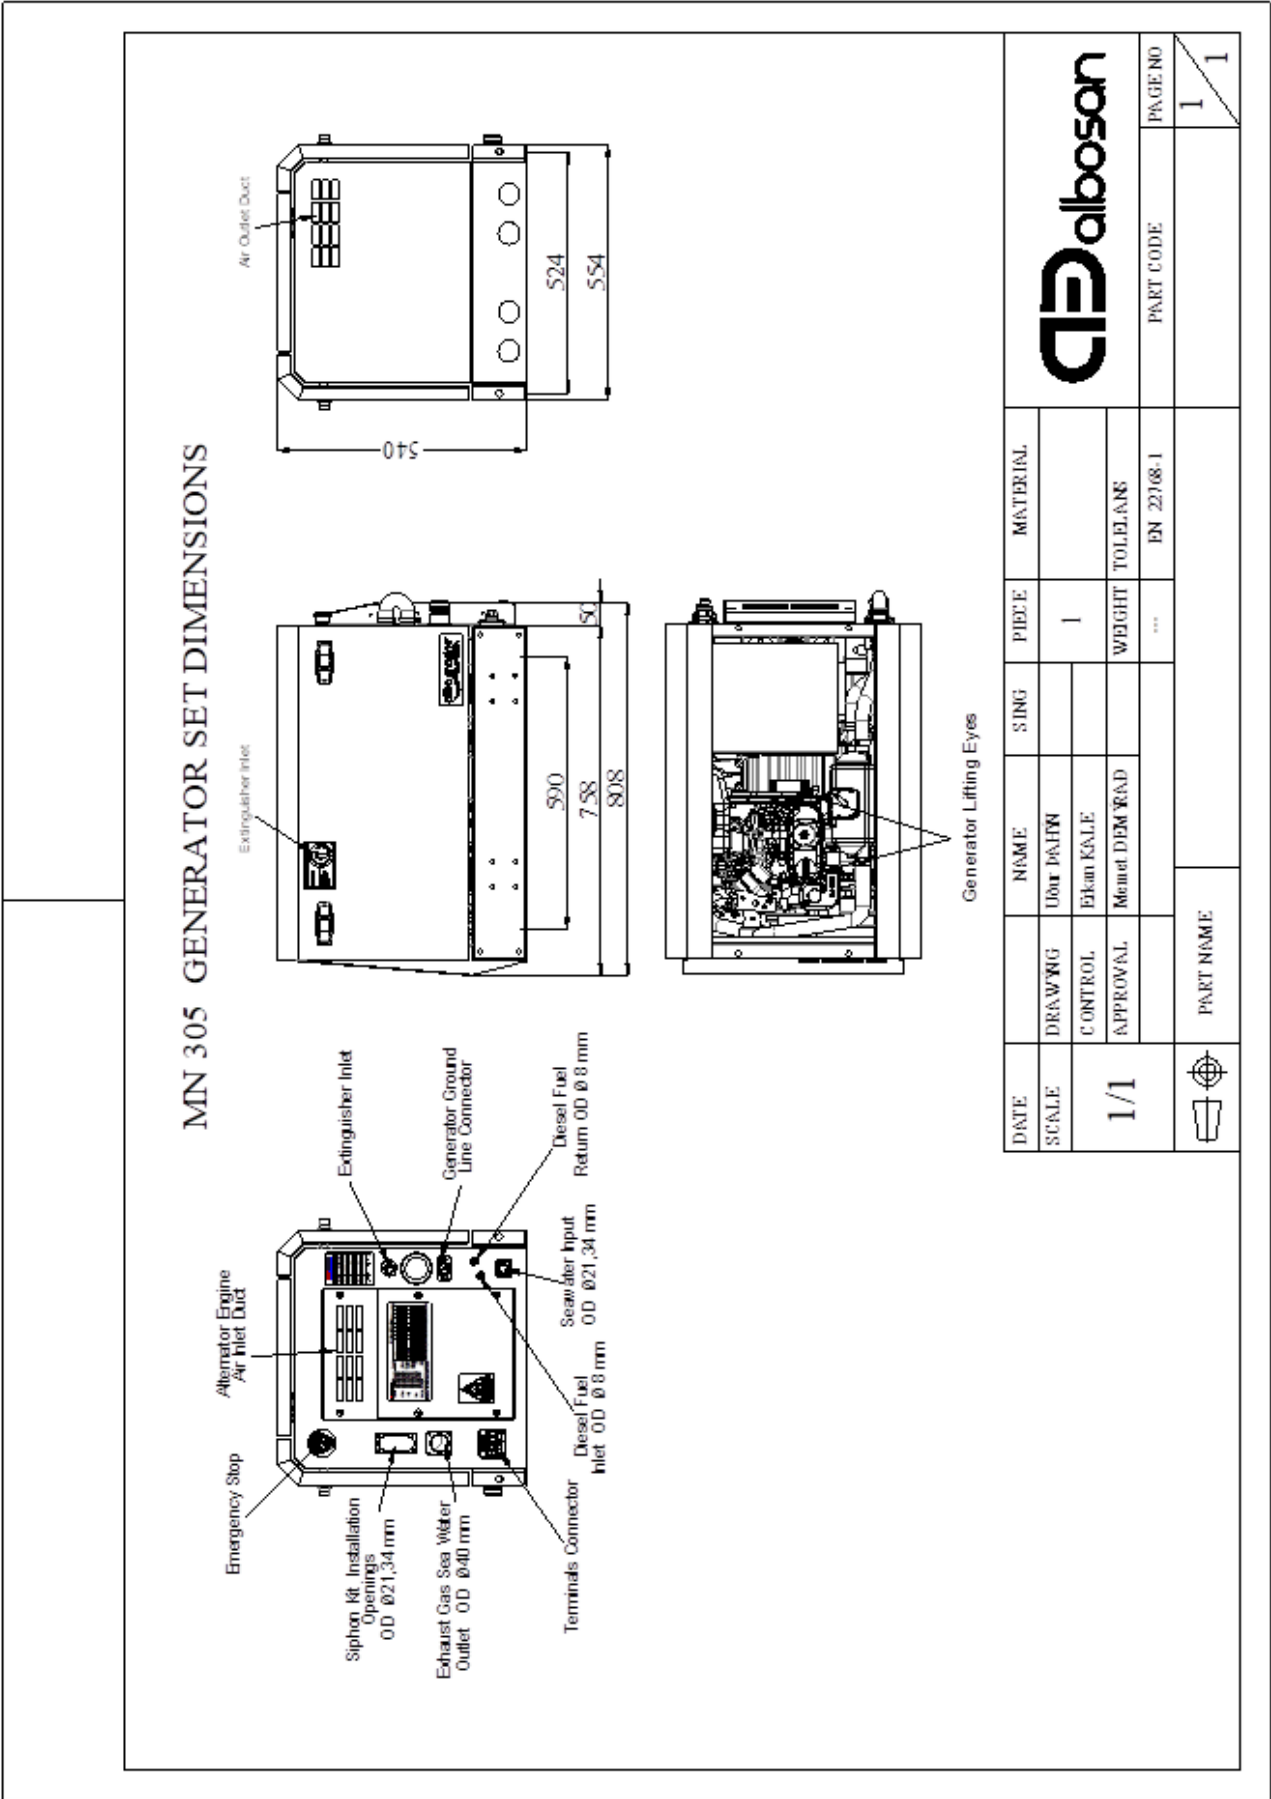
GENERATOR SET DIMENSIONS - MN 305
